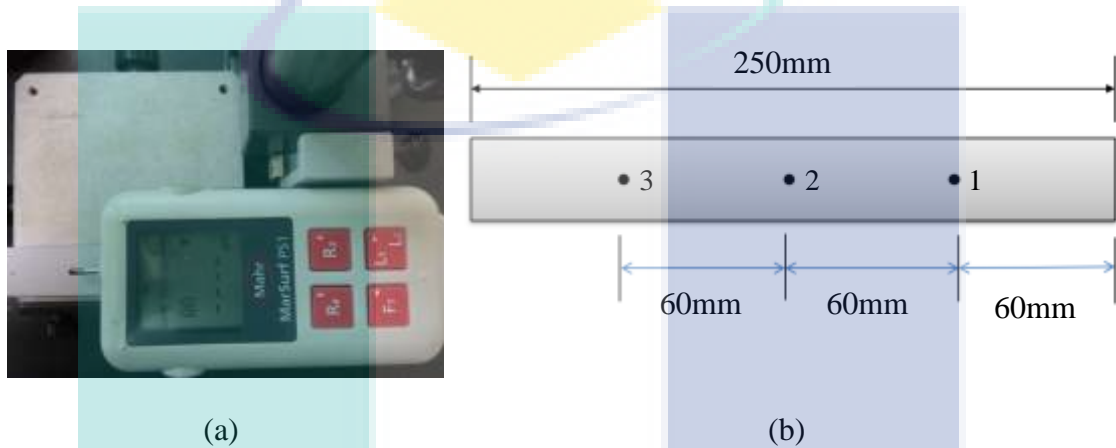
Surface roughness from top view (a) MarSurf PS1 machine, (b) schematic diagram of the location reading point on the specimen
